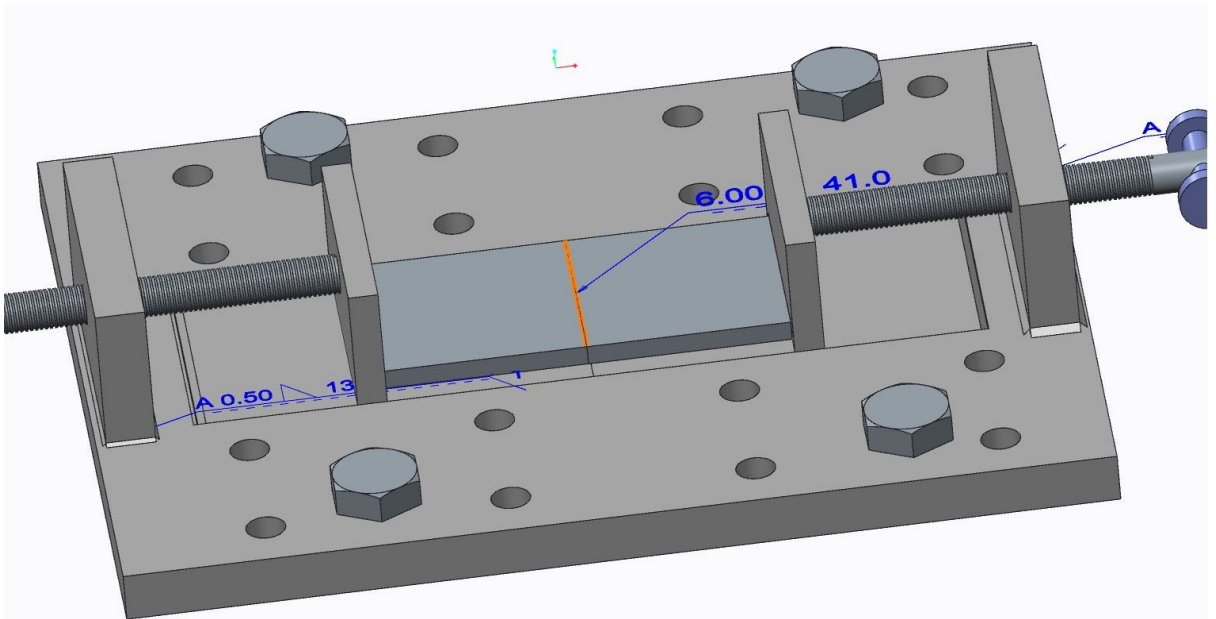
Fixturing for a welding of butt joint on both sides to move the robot freely.
